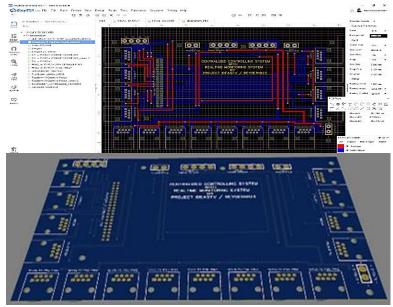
Main Controller Printed Circuit Board Layout and 3D view
